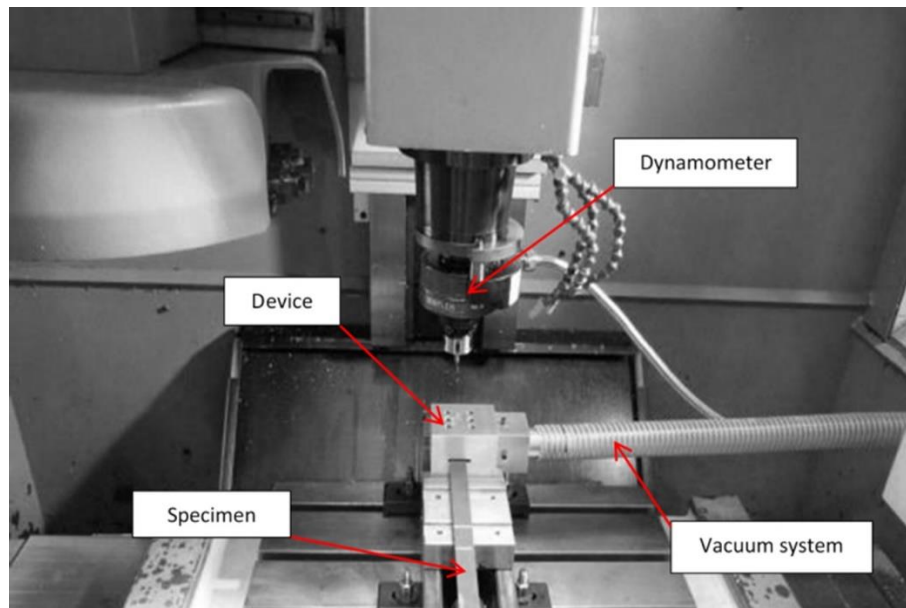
Machining centre used for drilling tests, showing Dynamometer Kistler 9123C and vacuum system for chip collection.
